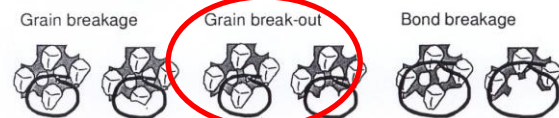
Fracture phenomena in the grit break-out experiment
